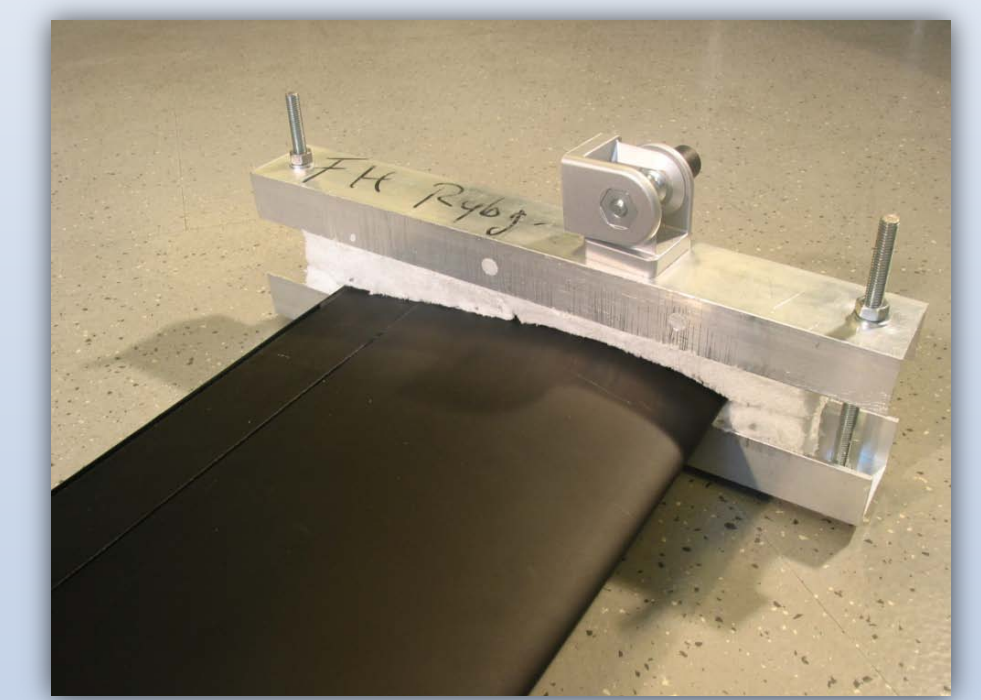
holding fixture with wing and the device for the adjustability of the angle of attack
